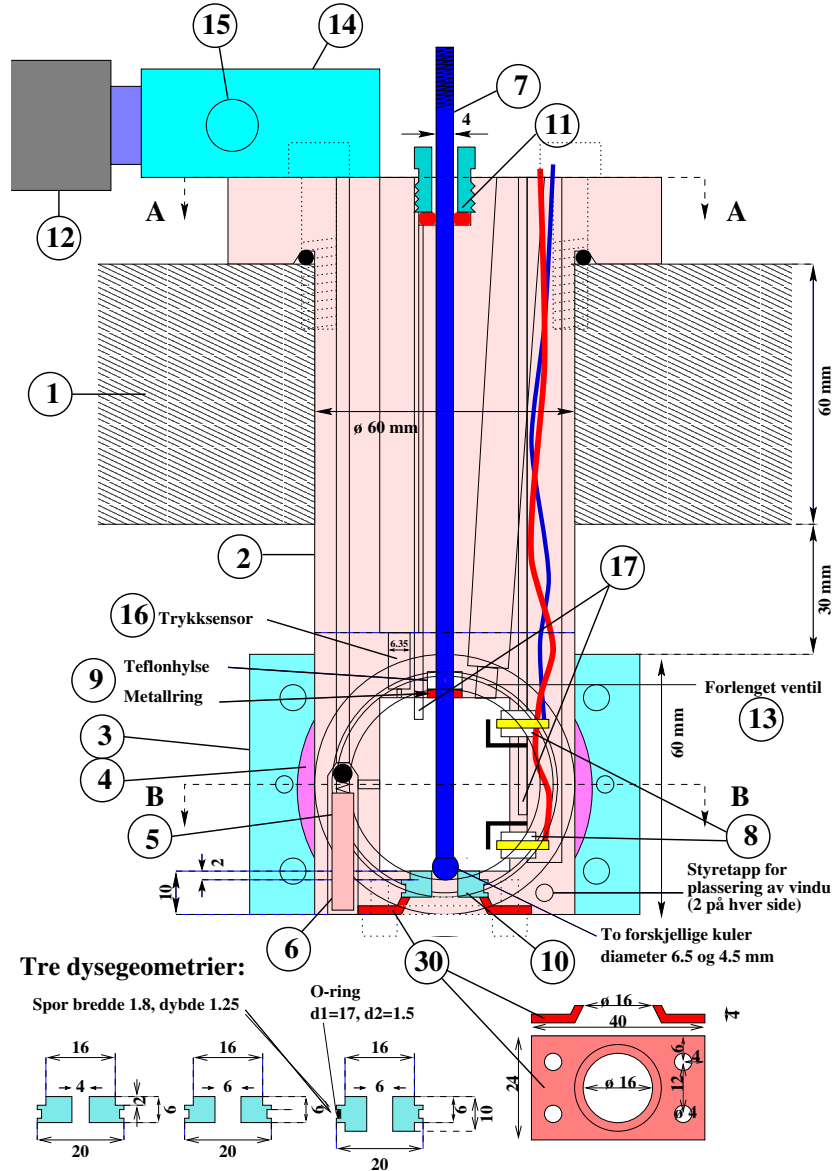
Cutaway drawing of prechamber assembly consisting of the following main parts: (1) Bomb housing, (2) Prechamber housing, (3) Window and holder (two off, one on each side), (5) One way valve for gas supply, (7) Pin for closing then nozzle, (8) Spark plugs, (10) Nozzle, (12) Valve for gas supply, solenoid operated, (13) Exhaust valve, solenoid operated, (14) Gas supply manifold, (16) Pressure sensor, (17) Temperature sensors, (30) Nozzle holder.
